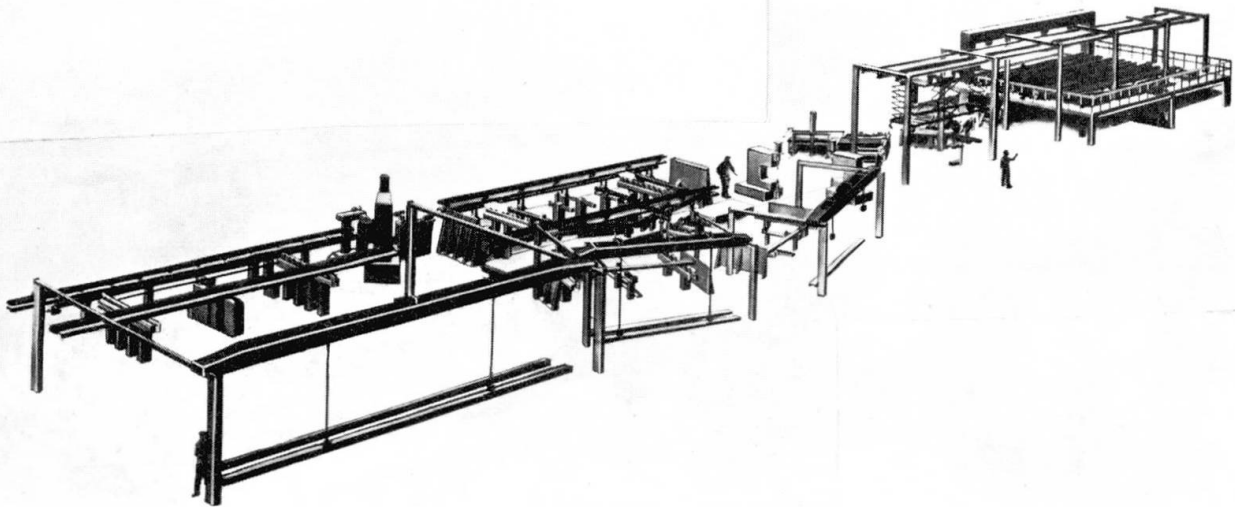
General view of latticed purlin assemblage-and-welding flow line.
